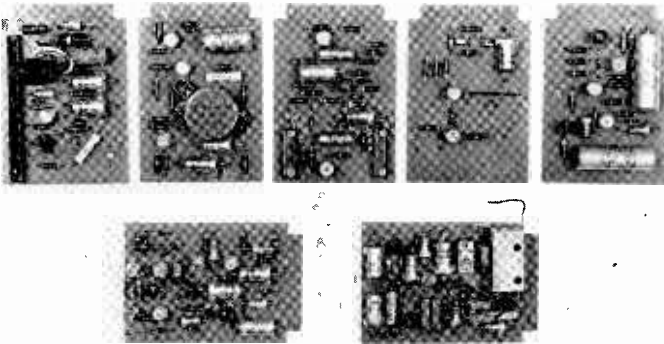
Printed wiring boards for Stratoscope I television camera.
